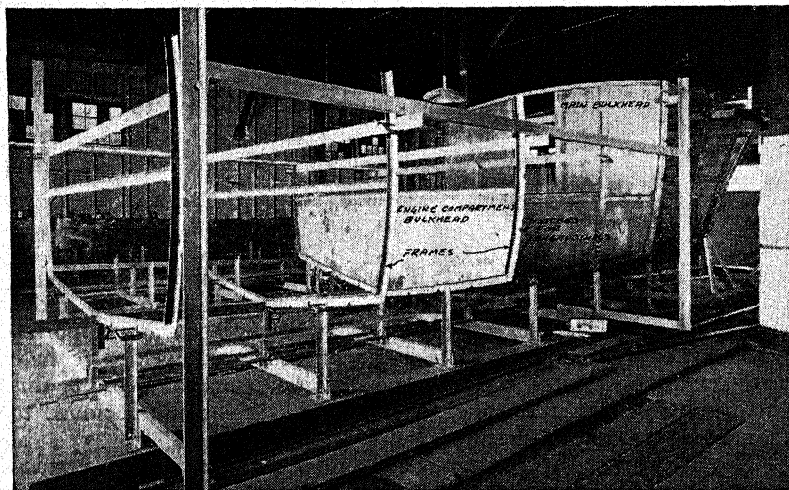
Quartering view of jig, showing aft frames, main and engine compartment bulkheads in place.
